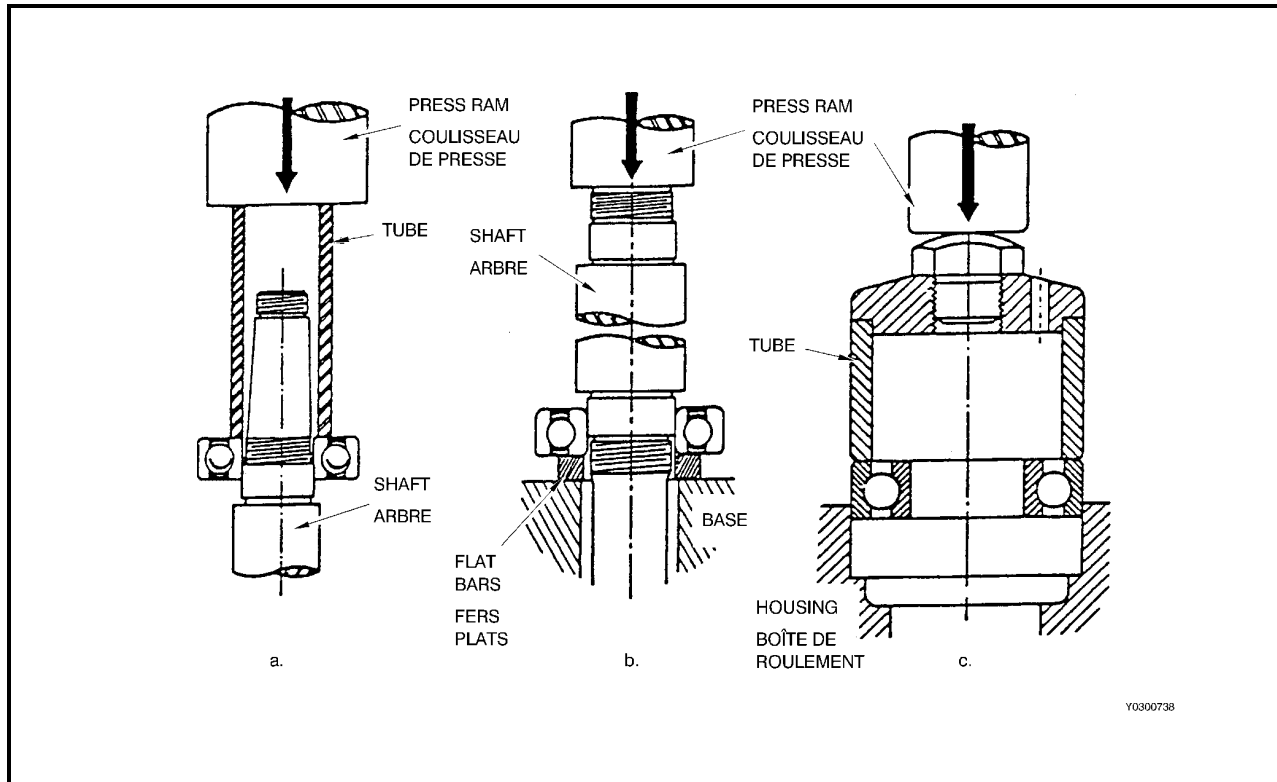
Pressing Bearings on Shaft with an Arbor Press
